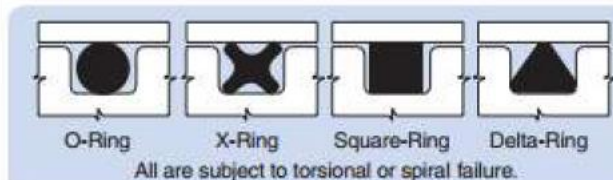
Ring Cross-Sections for Reciprocating Seals
